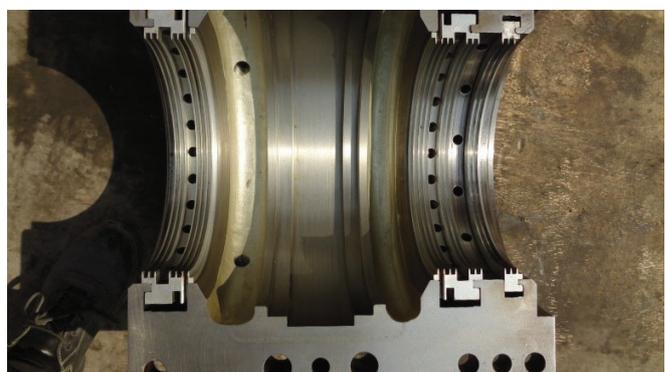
Bearing 1 housing top cover labyrinths after cleaning
